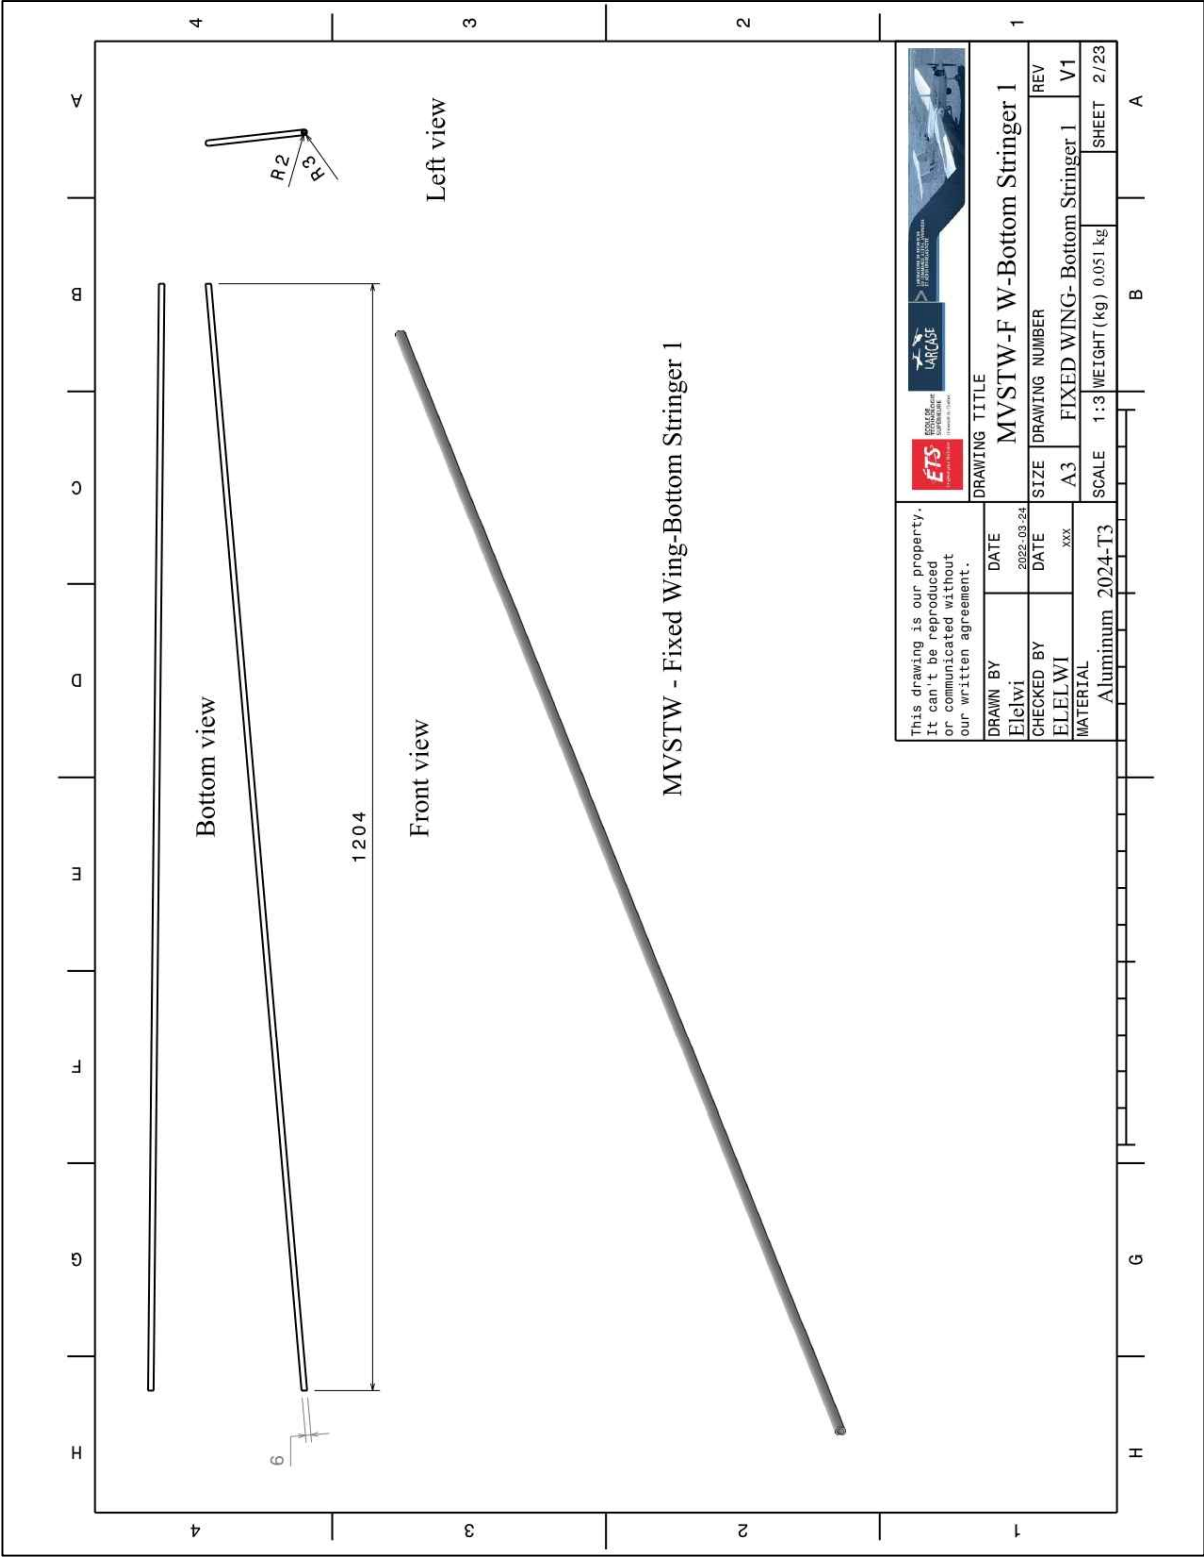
MVSTW Fixed Wing Bottom Stringer1 Using Al 2024-T3
